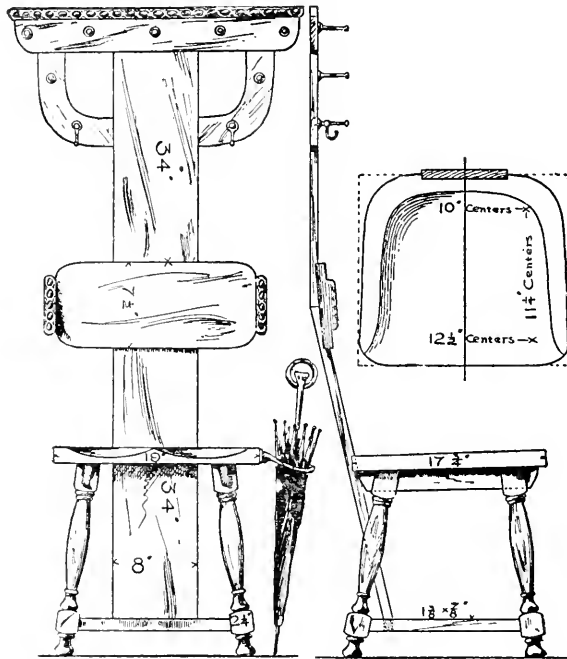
Front, Side and Plan Views of a Convenient Hall Tree.
